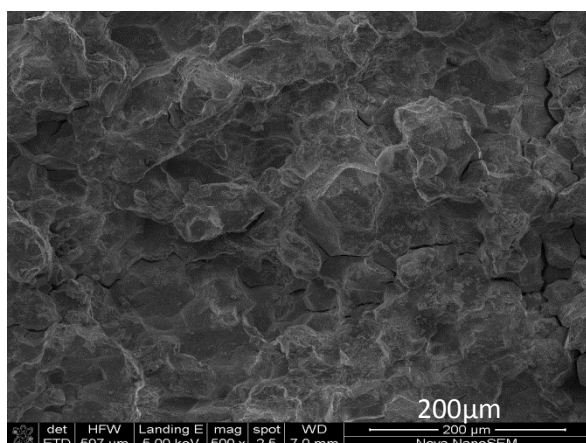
Fracture surface of 480°C temper U-bend specimen cracked in 3.5% NaCl, showing intergranular SCC and secondary cracking
